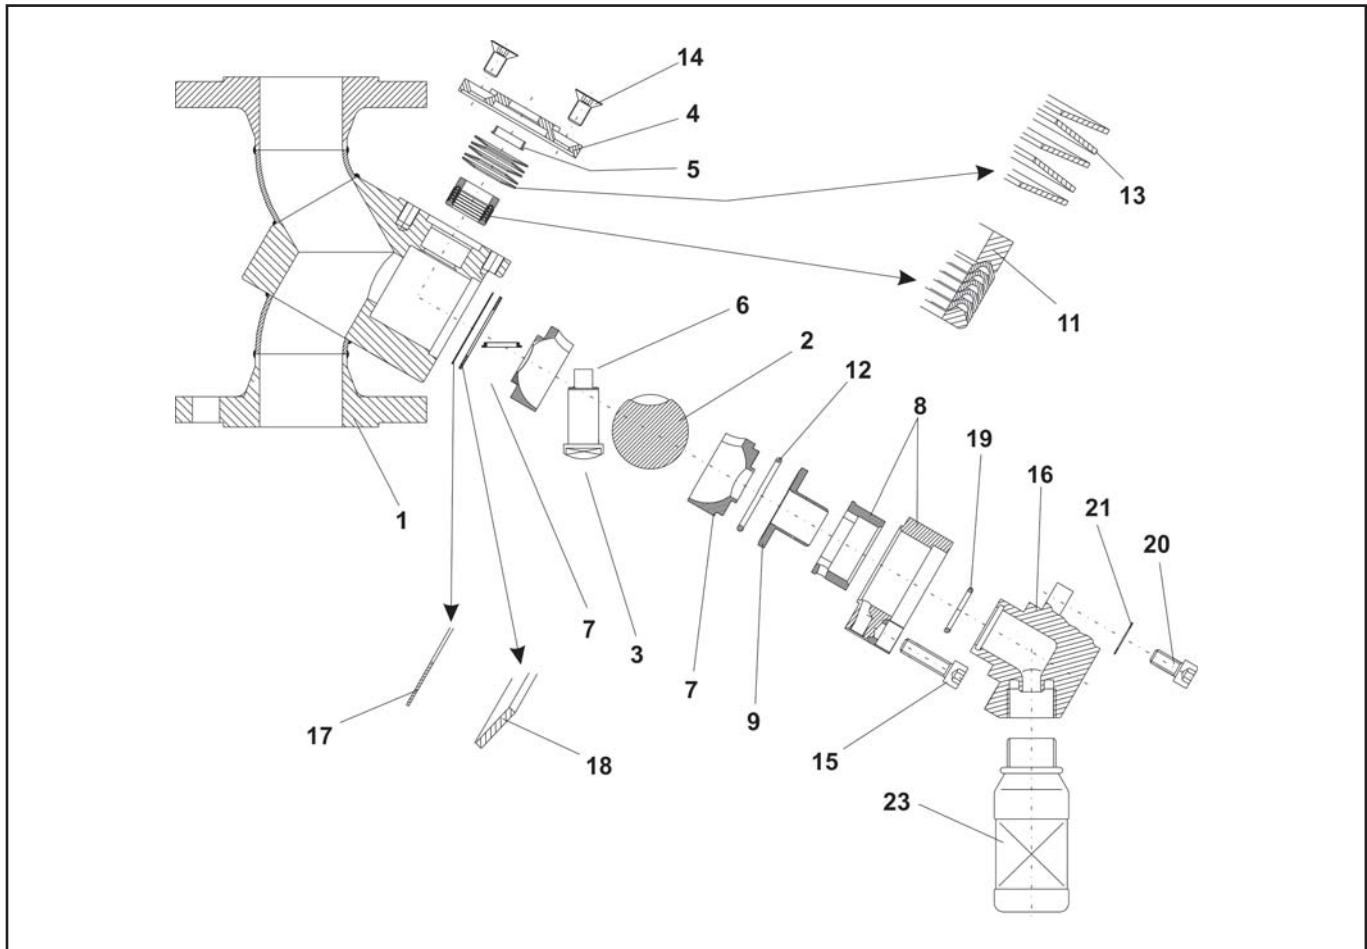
Explosion drawing of the sampling valve BR 27g
